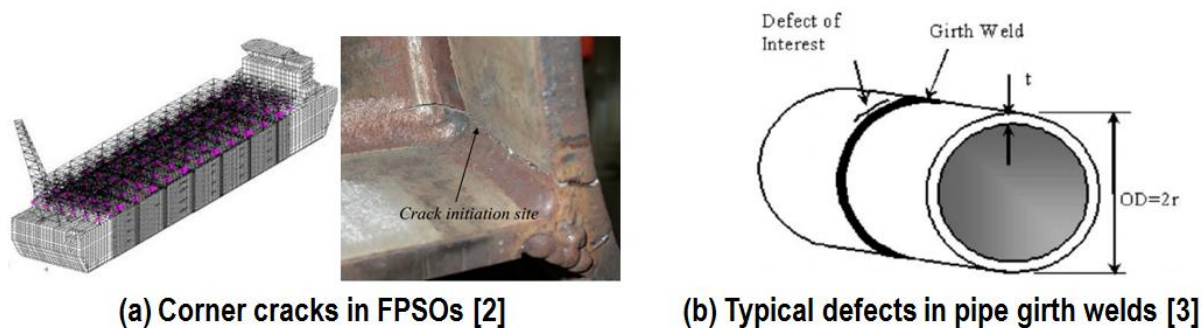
Welding-induced residual stress impact structural integrity: (a) corner cracks in FPSOs [2], and (b) typical defects in pipe girth welds [3]
